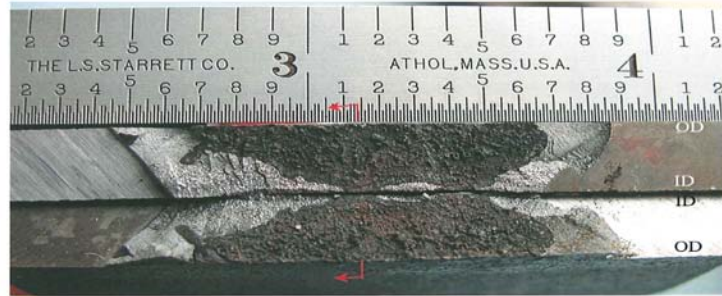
Surface Broken After Chilling Showing a Cold Weld Leak in DC-ERW Pipe
